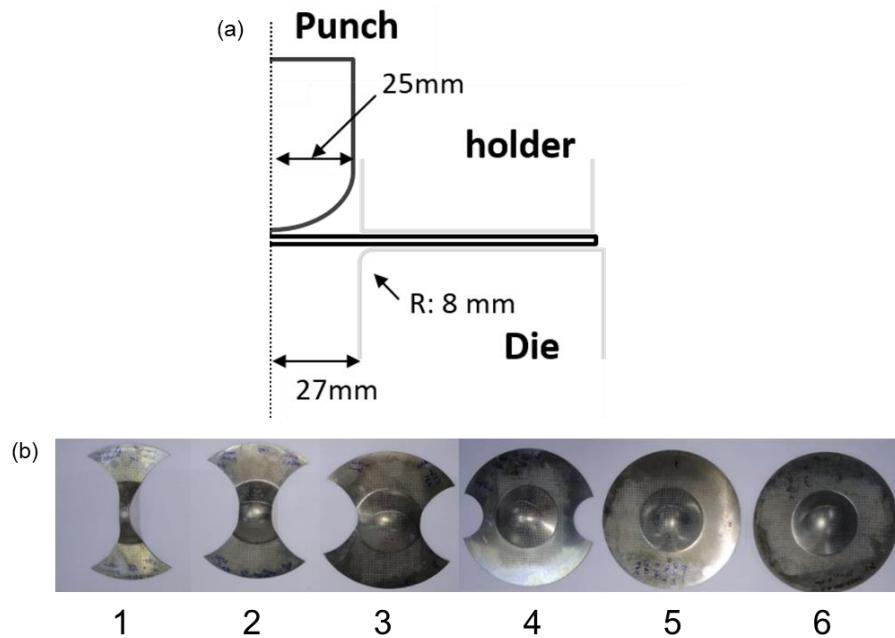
(a) Tool dimensions for the forming limit test, (b) specimens for different loading paths
